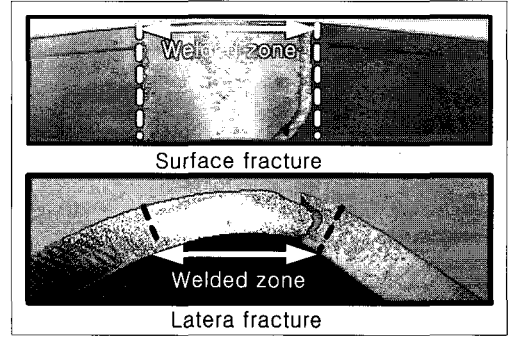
Fracture surface and lateral face of the defect-free guided bending test specimen by FSW
